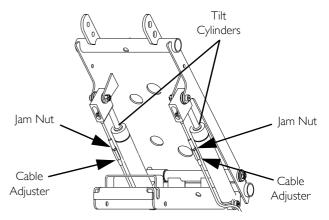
Adjusting the Manual Tilt Cable Assembly
